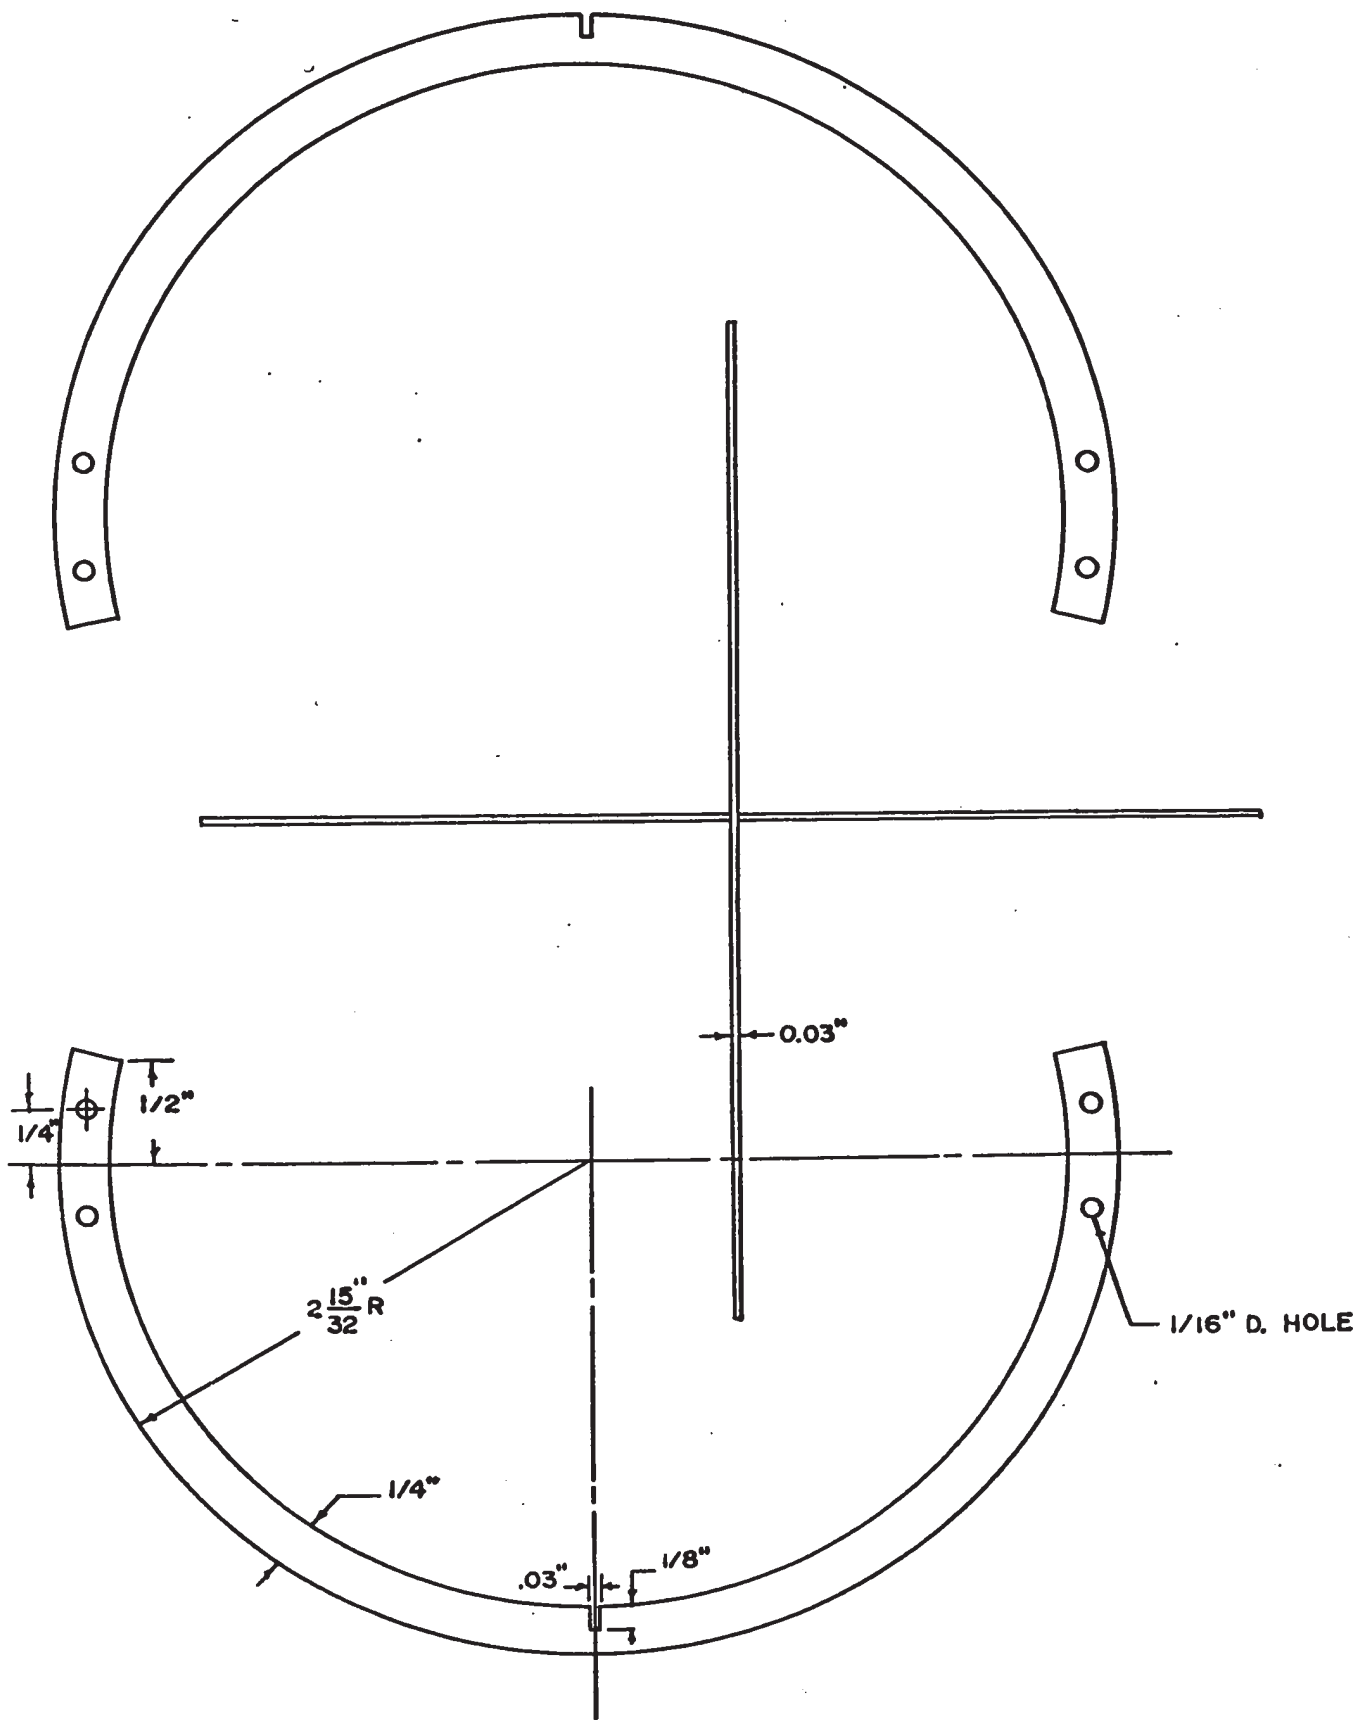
C SILVER SUPPORT FRAME (LOWER PART) FOR
